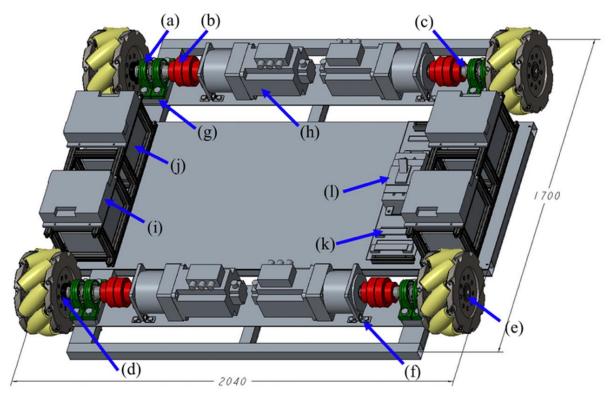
The mechanical design of the MWGV: (a) ball bearing, (b) coupling rubber, (c) axle, (d) fixing ring, (e) washer, (f) L-shaped bracket, (g) metal plate, (h) motor and reducer, (i) driver, (j) battery, (k) copper ground bar, (l) fuseless breaker [10]
